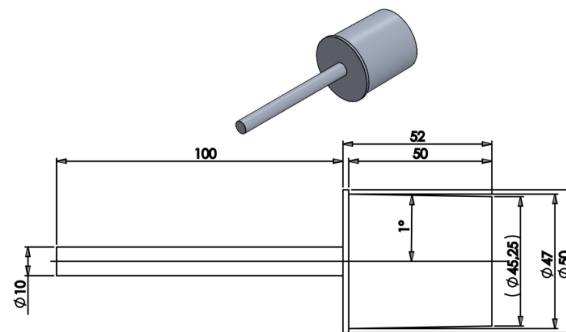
Technical drawing of Fiber spinning cone 1.
